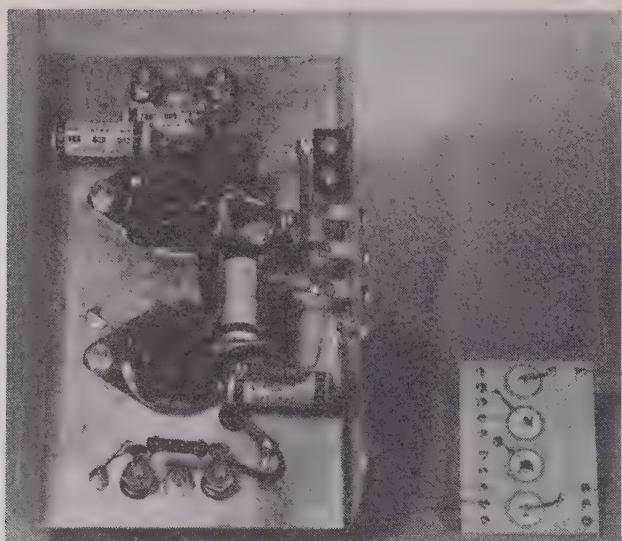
View of bottom sides of printed and conventional units of Fig. 2.
